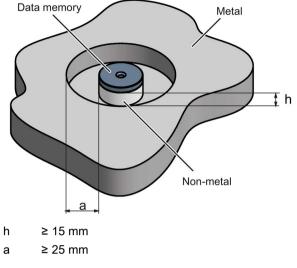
Flush-mounting of the MDS D124/D324/D424/D524/E624 and RF320T in metal with spacer
